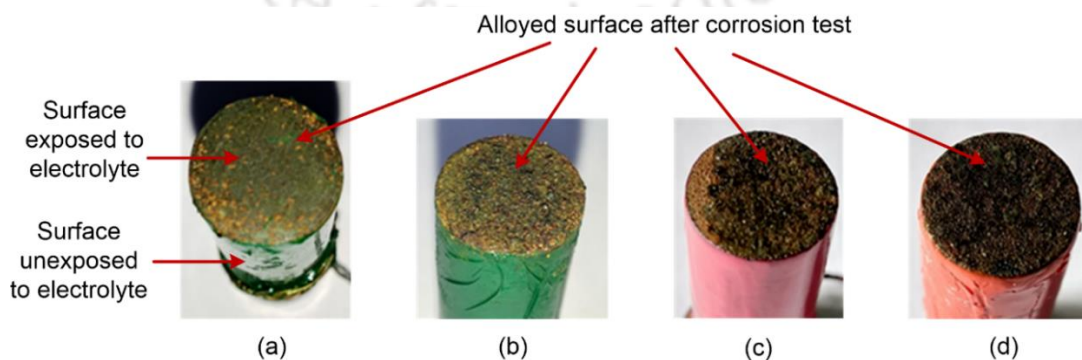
Camera images after corrosion test for (a) Unprocessed workpiece and workpieces alloyed in (b) Hydrocarbon oil (c) Deionized water and (d) Urea mixed deionized water
